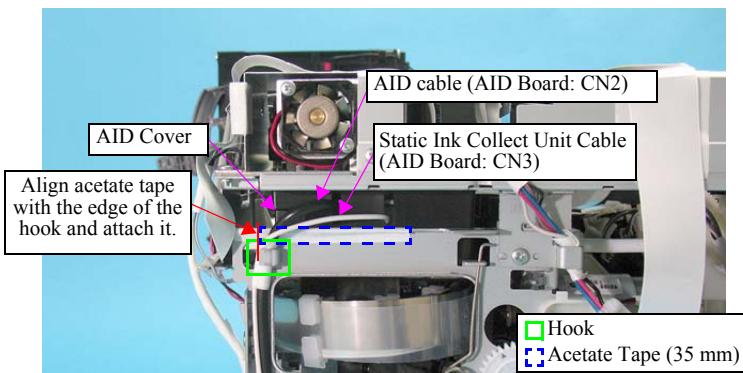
Routing Cables around the Main Board. Unit (4)
